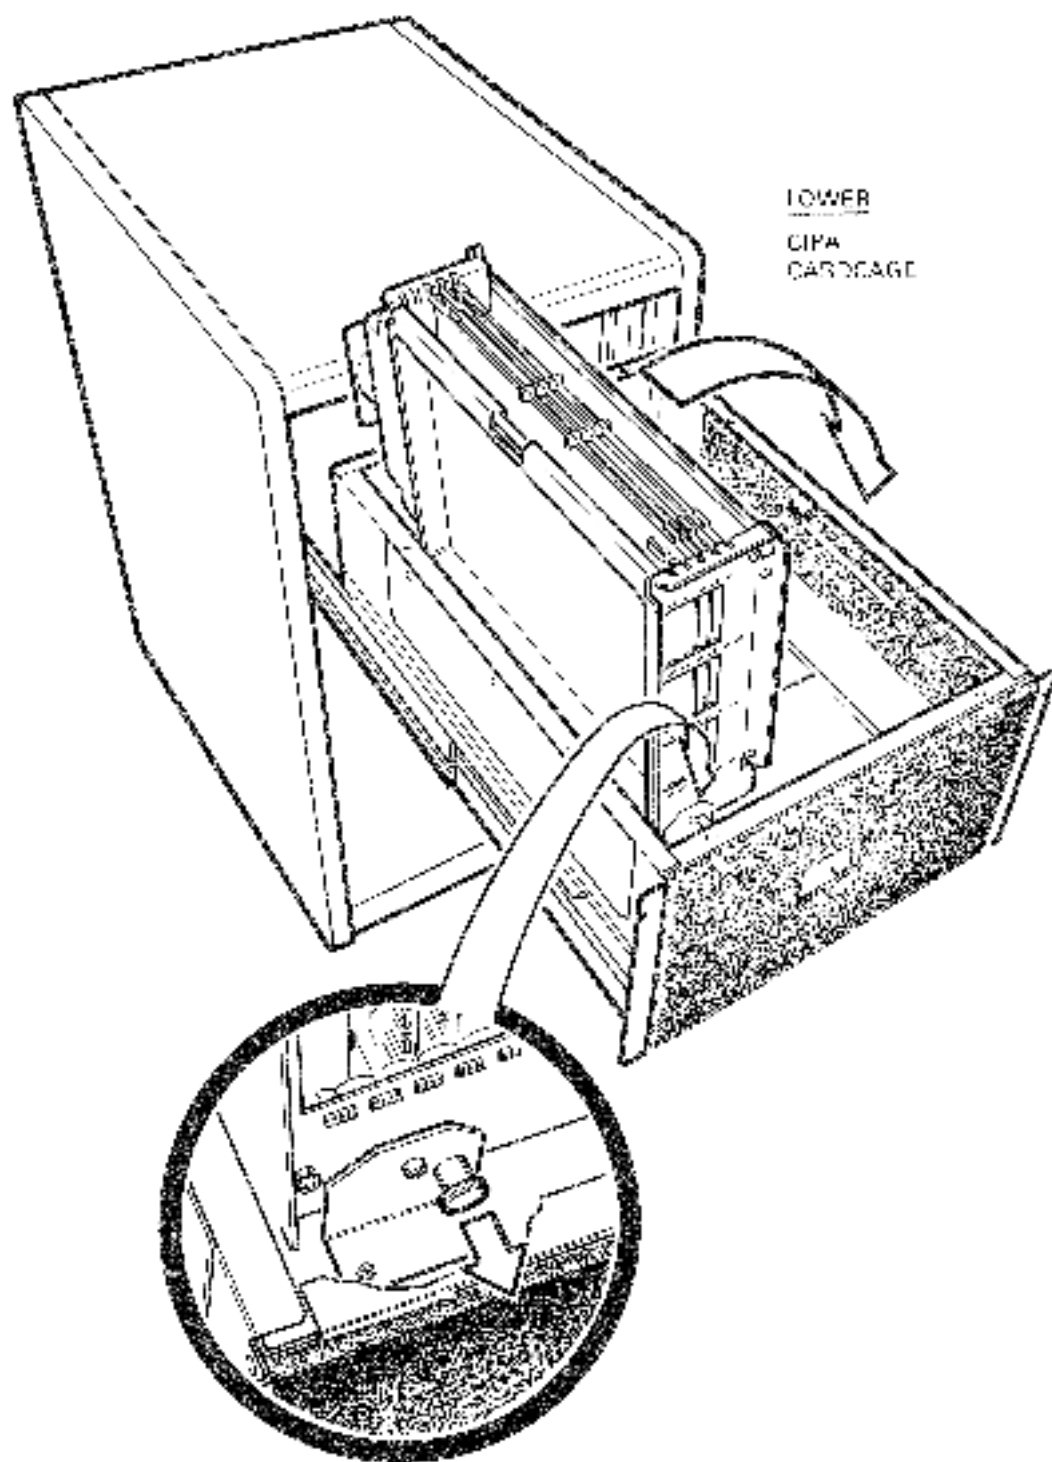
CIPA Mounting Box - Module Access (Sheet 2 of 4)
